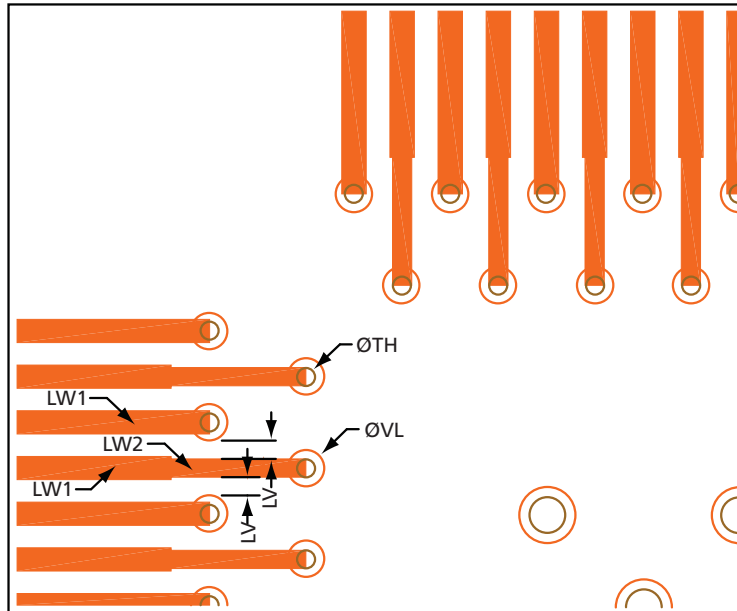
• Soldered Pads for QFN Packages (PCB lower layer)
